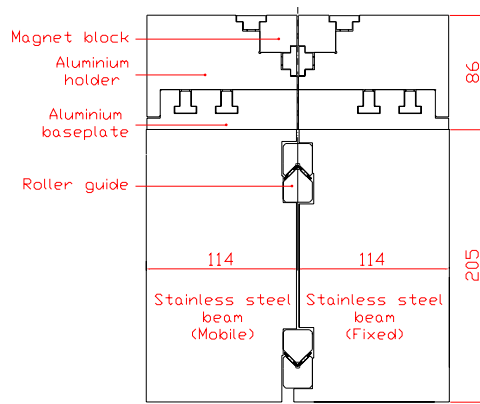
Schematic drawing of the phase shifting mechanism, base-plate and block holders.
